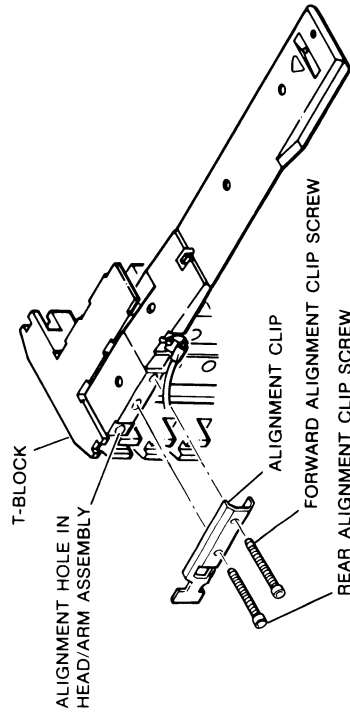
HEAD ALIGNMENT CLIP AND SCREWS
